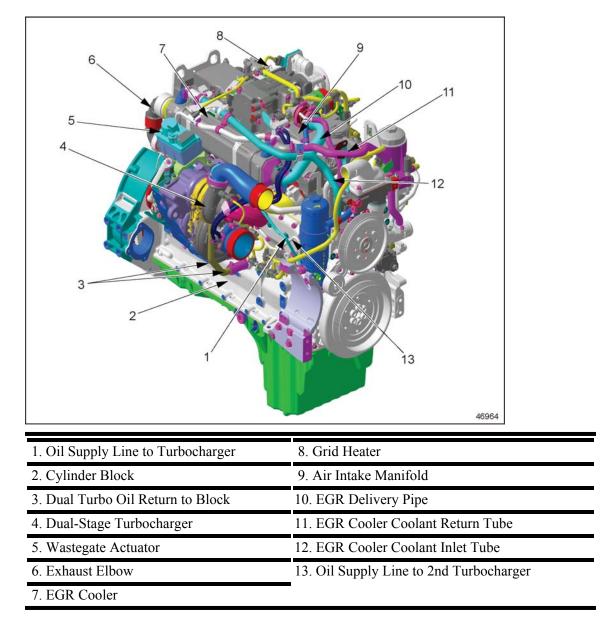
Right Side View of MBE 900 Engine (Dual-Stage Turbocharger) and Components
